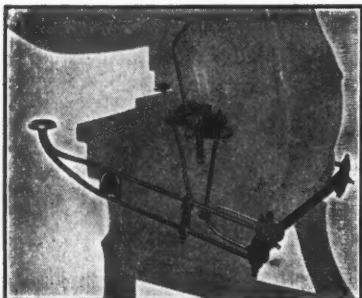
Drawing of Lever Templates. These Templates Provide the Means for Determining the Positions of the Slides Directly
